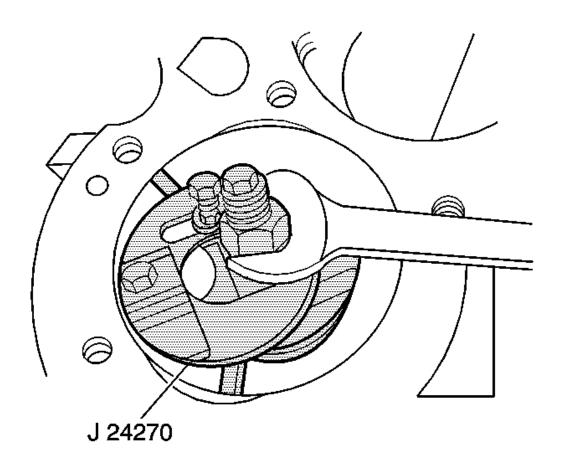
Removing Cylinder Bore Ring Ridge Courtesy of GENERAL MOTORS CORP.
